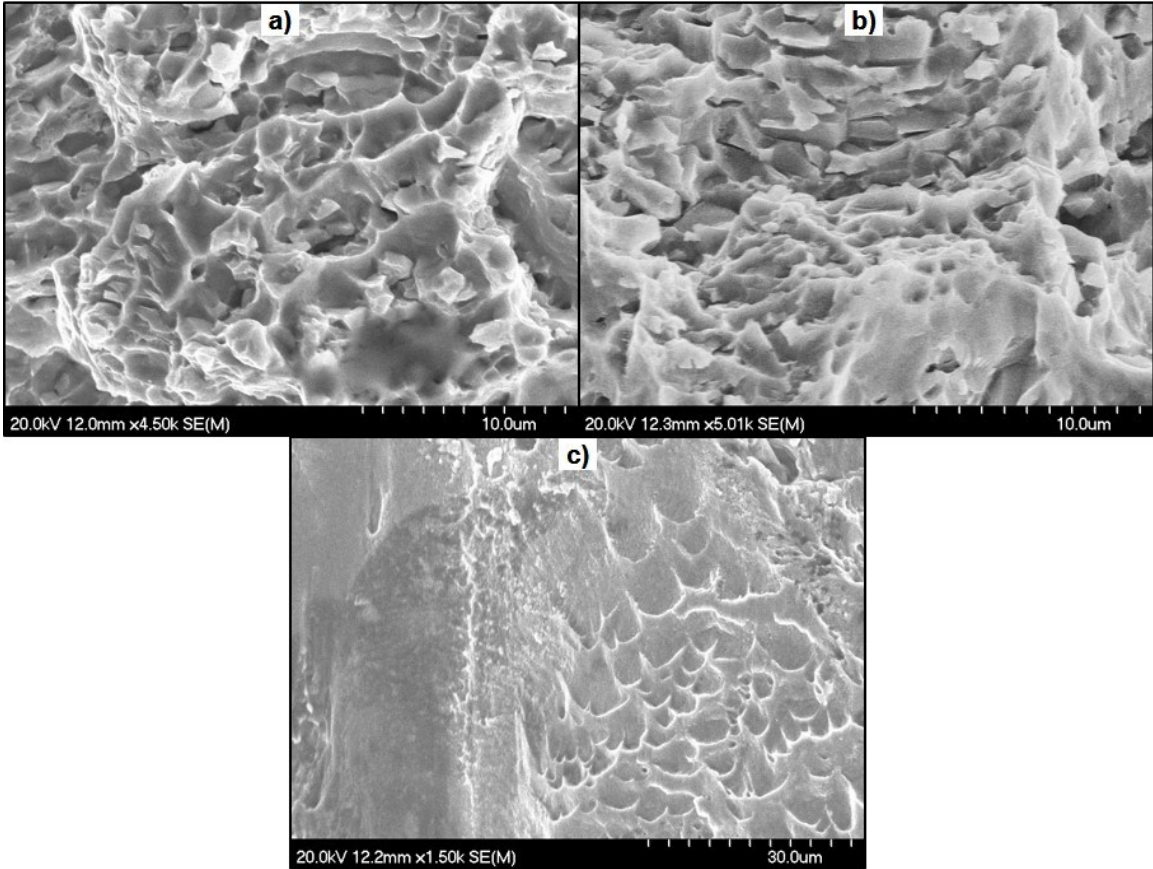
SEM micrographs of Ni30/IN625 (N2) shear fracture surface of bottom plate. Fracture surface of a) BM/DAZ interface b) DAZ/braze joint, and c) braze joint in shear region.
